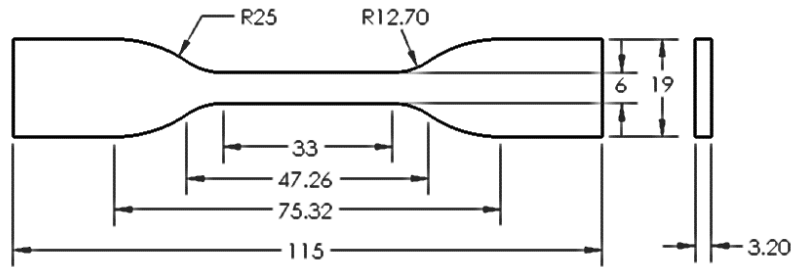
Tensile testing specimen (all dimensions in mm).
